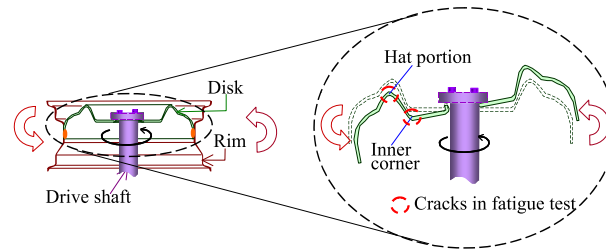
Locations of cracks in rotating bending fatigue test of steel wheel.
